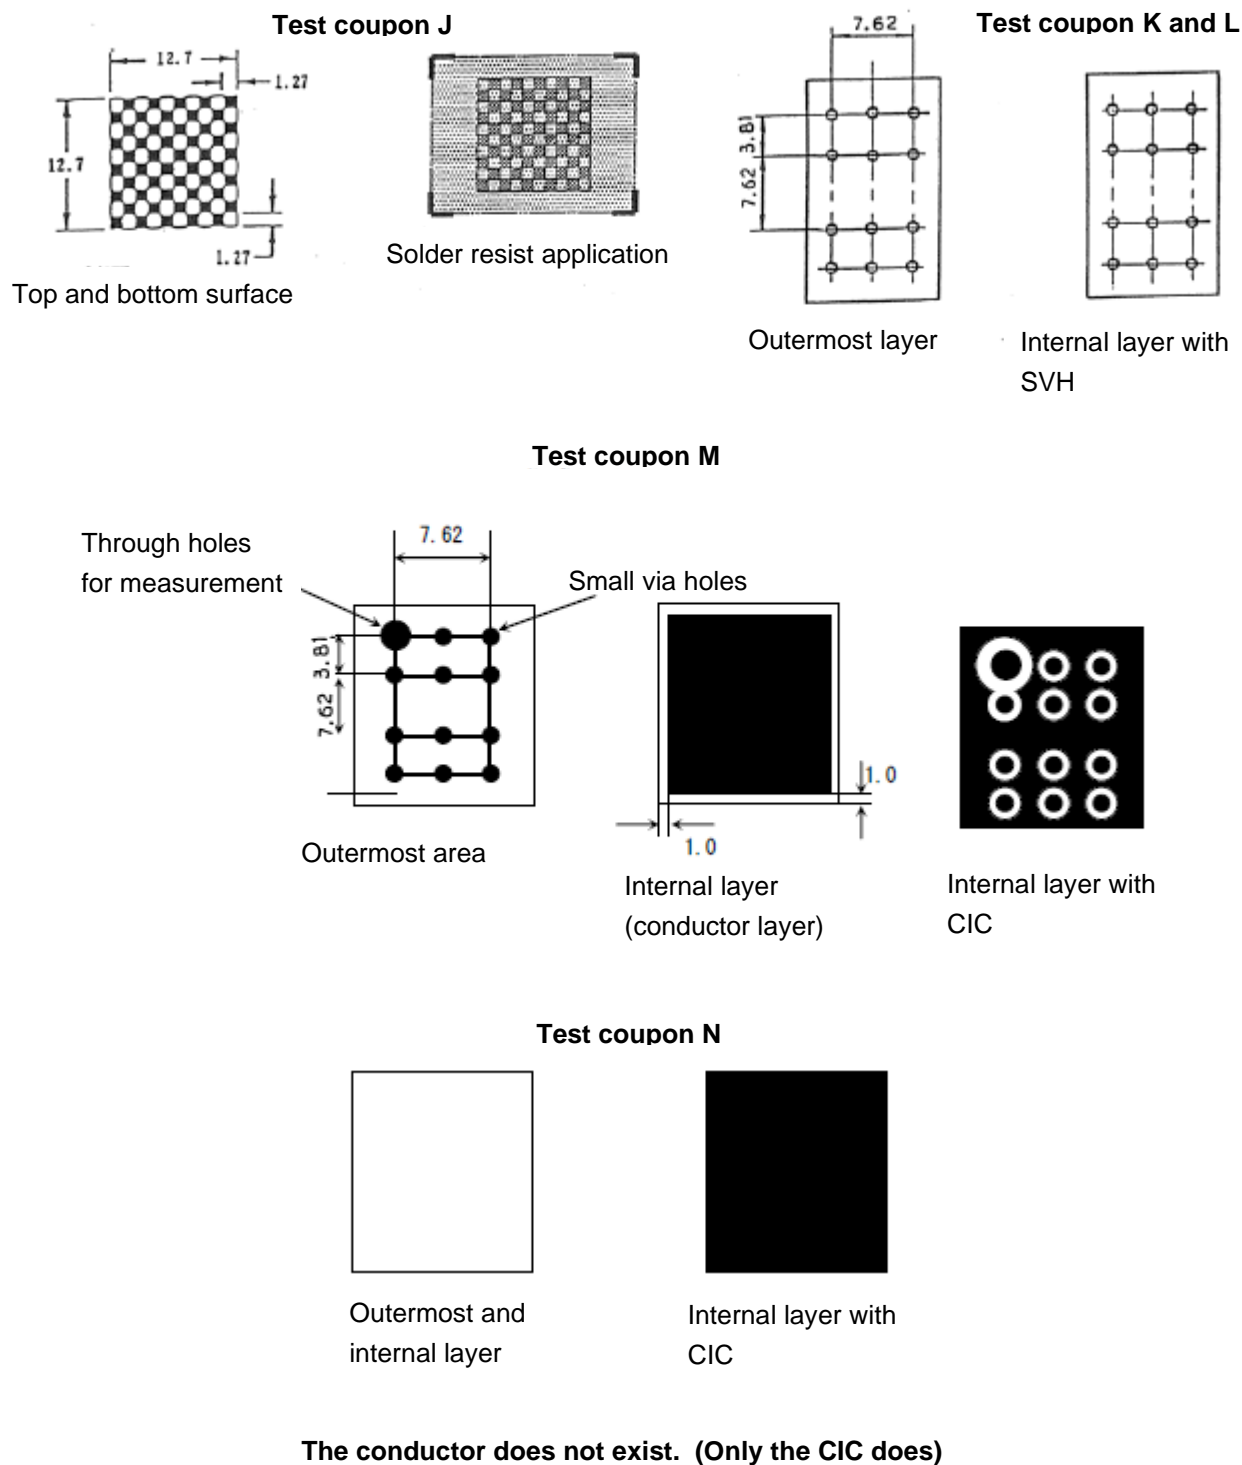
Test Coupons (for Multilayer Printed Wiring Board) (4/4)
